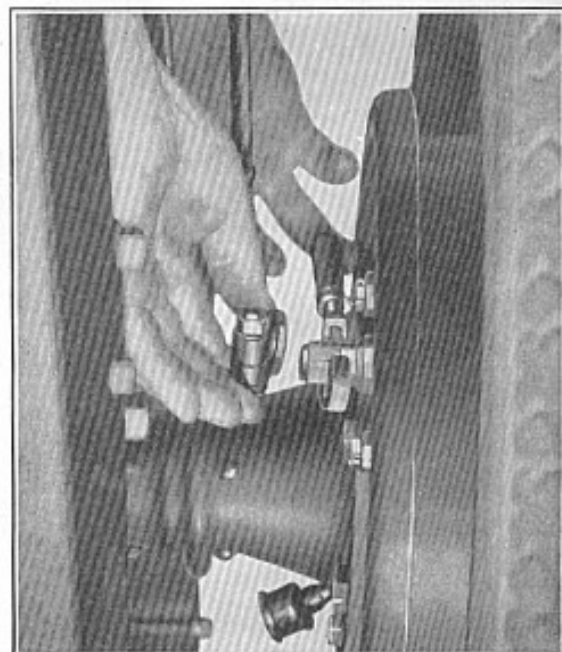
Applying rear brake with pipe wrench to set cam lever to proper position
